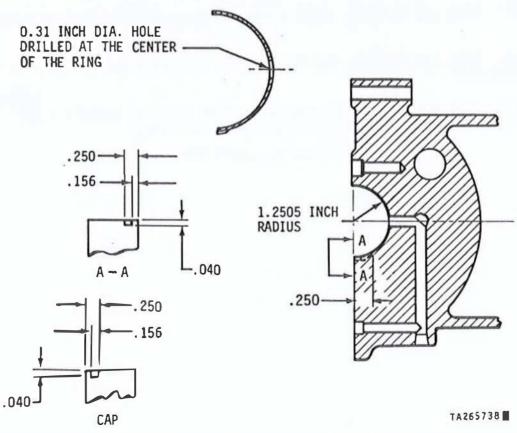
Machining Instructions for the Injection Advance Bore.
